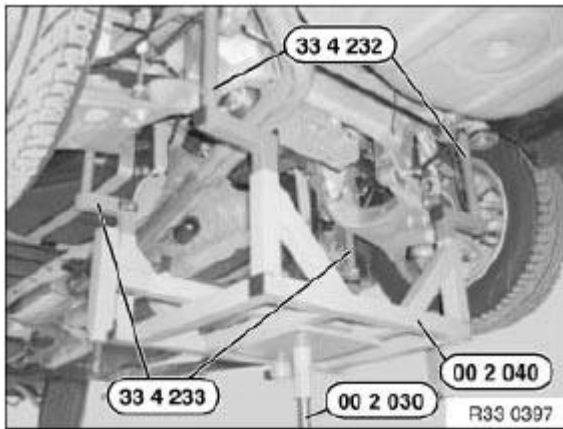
Identifying Special Tools (33 4 233 And 33 4 232) Into Corresponding Mountings
